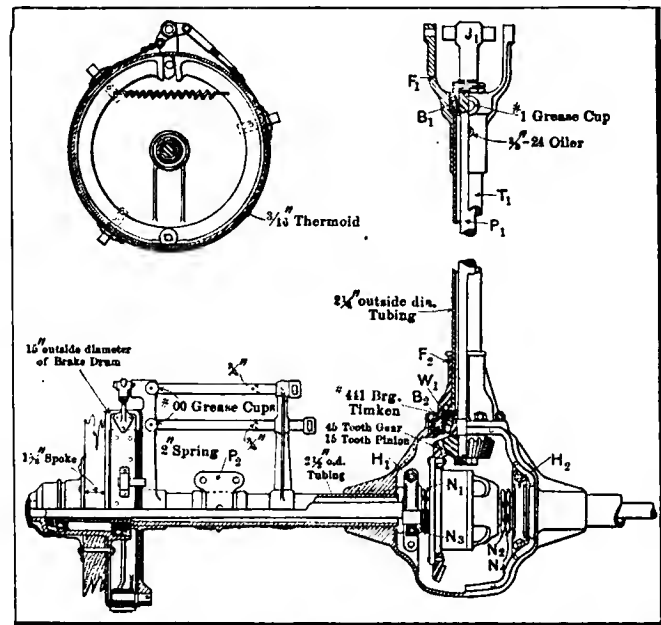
Live rear axle, showing torsion tube, propeller shaft, bevel drive and floating system
